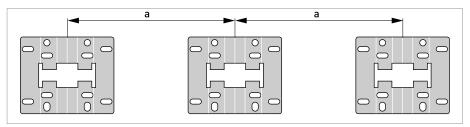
Mounting multiple devices next to each other a ≥ 240 mm / 9.4"
